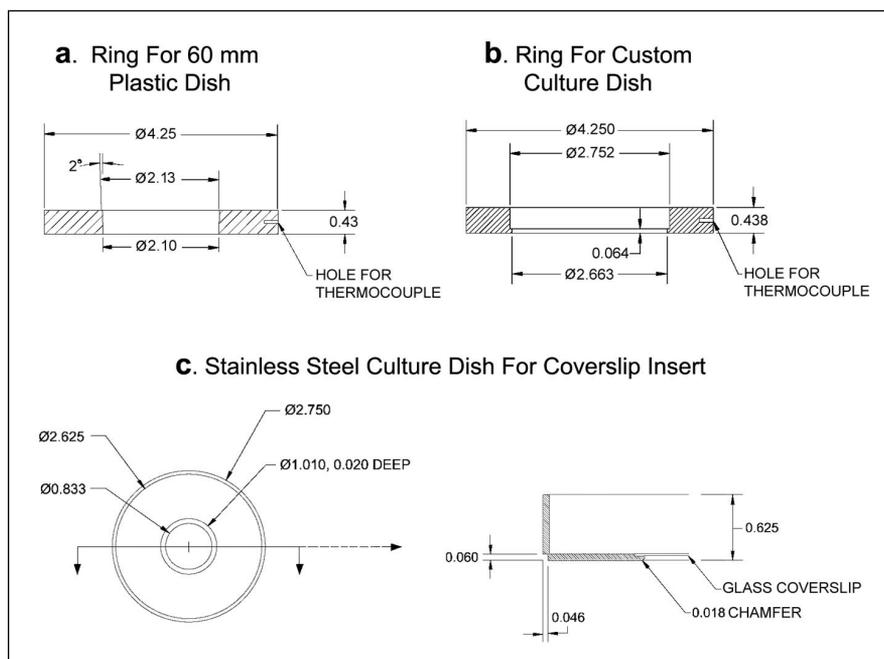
Drawings of the custom machined metal parts (all dimensions are in inches).
